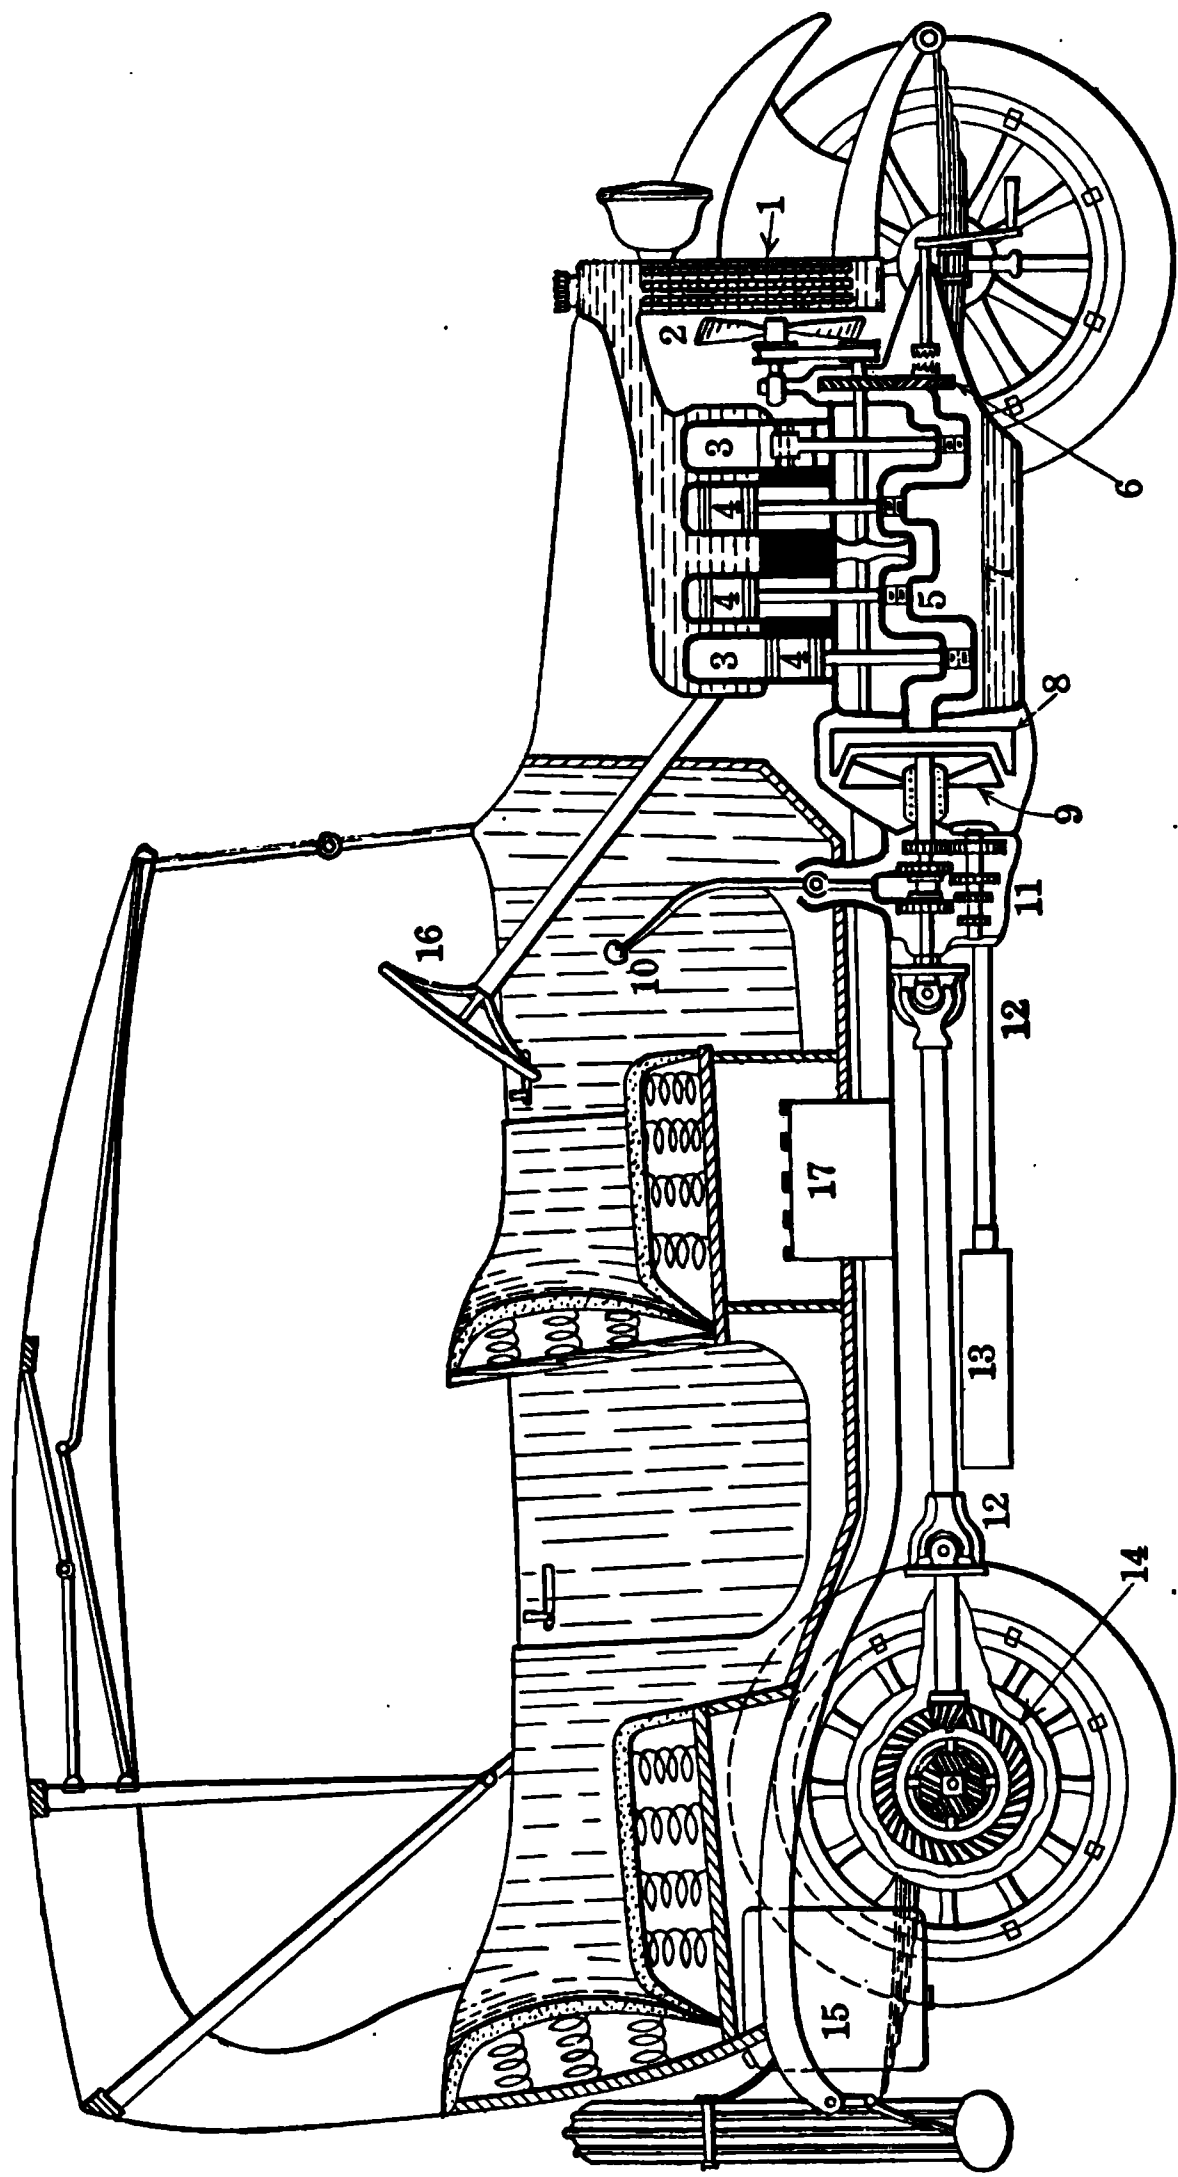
Diagram of car in profile. 1, radiator; 2, fan; 3, cylinders; 4, pistons; 5, crank-shaft; 6, timing gears; 7, oil reservoir; 8, fly-wheel; 9, clutch; 10, gear-shift lever; 11, transmission gears; 12, universal joint; 13, muffler; 14, differential; 15, gasoline tank; 16, steering wheel; 17, battery.
